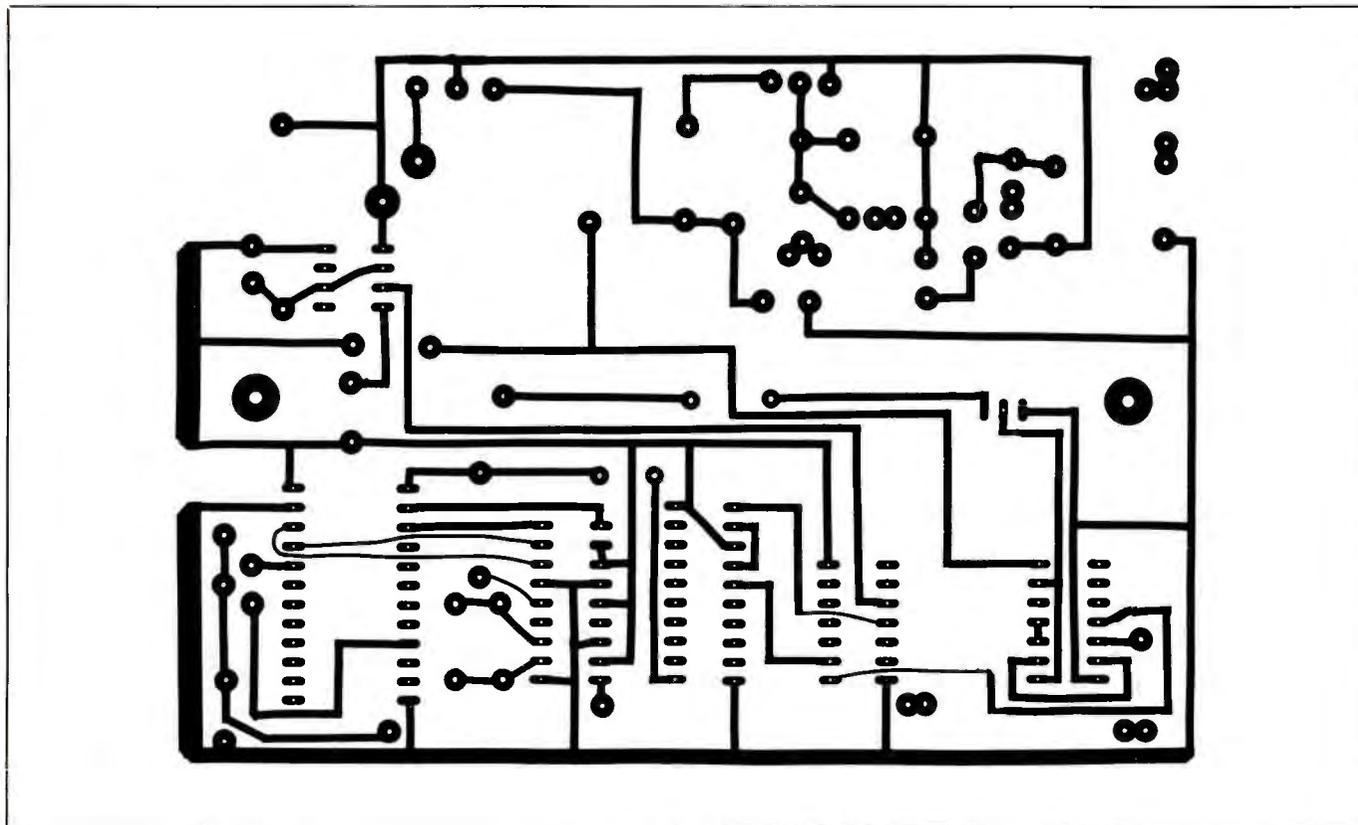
Actual-size etching-and-drilling guide for printed-circuit board.
